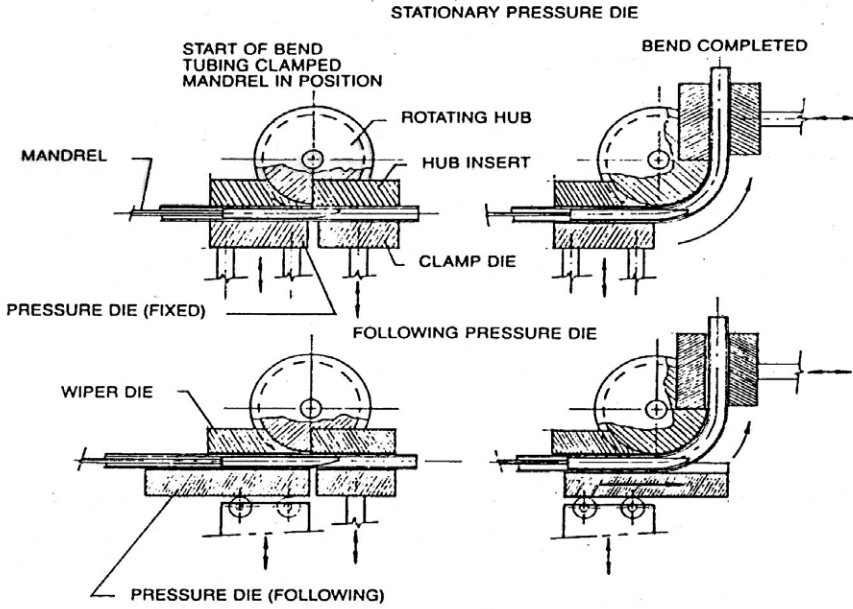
Operational drawing on the radial bending of round stainless steel hollow sections
